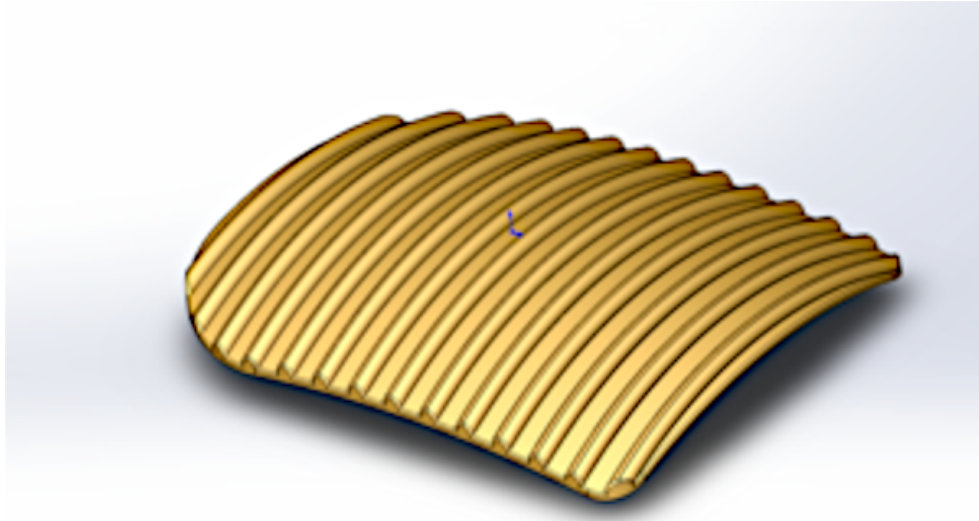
Concept Design for Patch Torque Device, Angle View [drawing]
